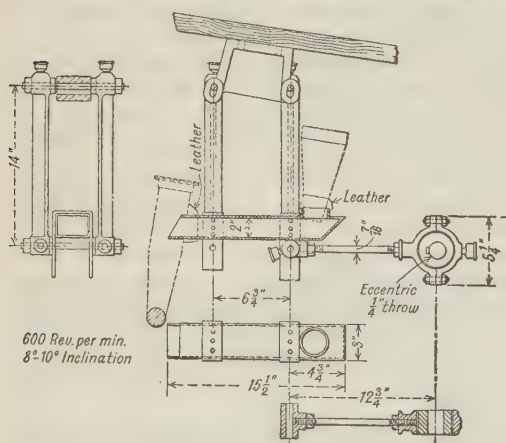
Shaking-plate feeder, Campbell and Deyell mill.
